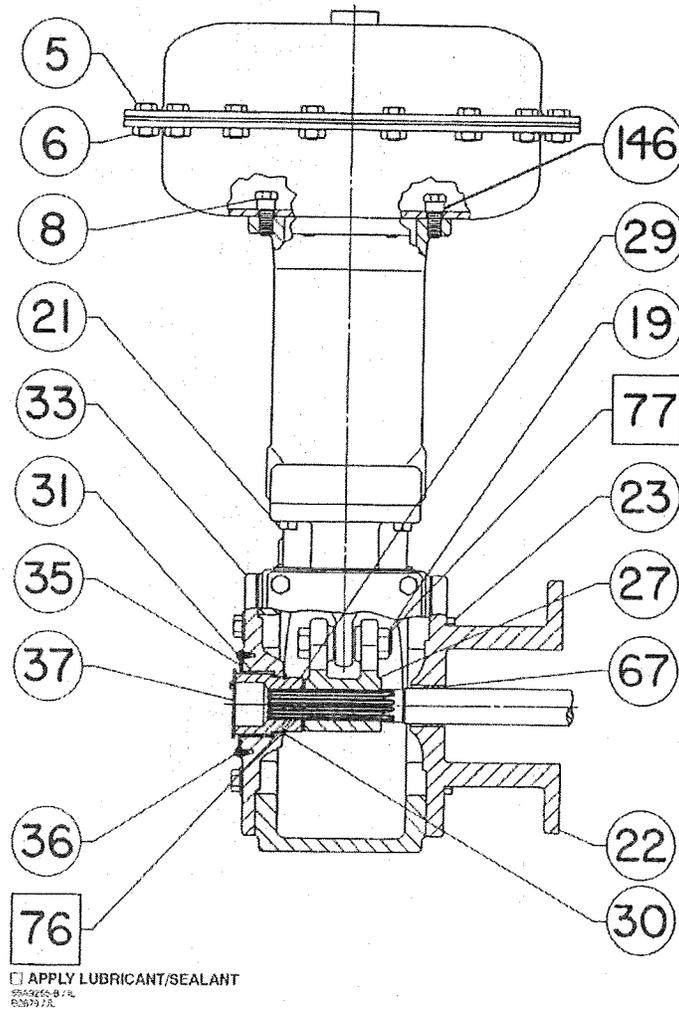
Typical Type 1051 Actuator Assembly (Continued)
